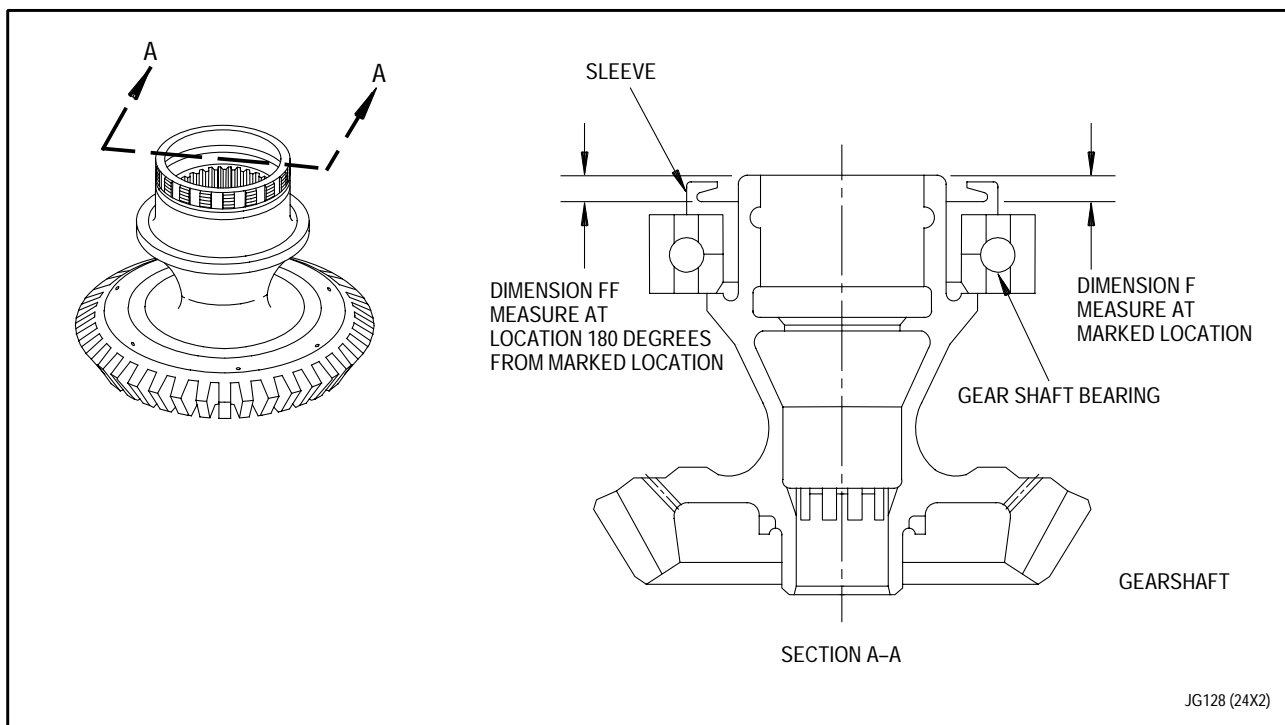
Gearbox Drive Bearing and Housing - Seating Check
